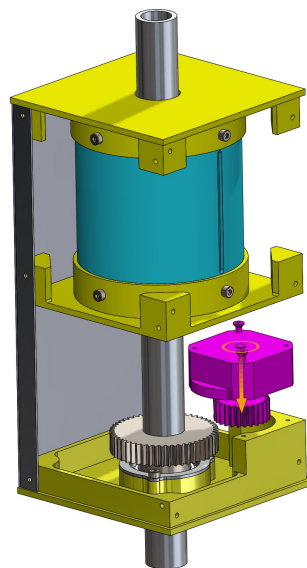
Mount the remaining gear to the motor and fasten the motor to the structure of left lid, with two socket countersunk head screws.
